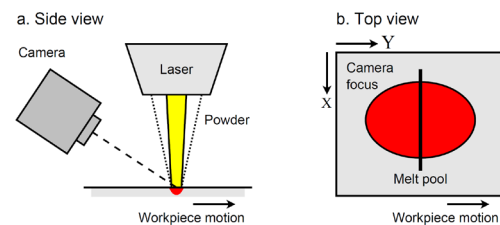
Side view (a) and top view (b) of the transverse laser cladding
